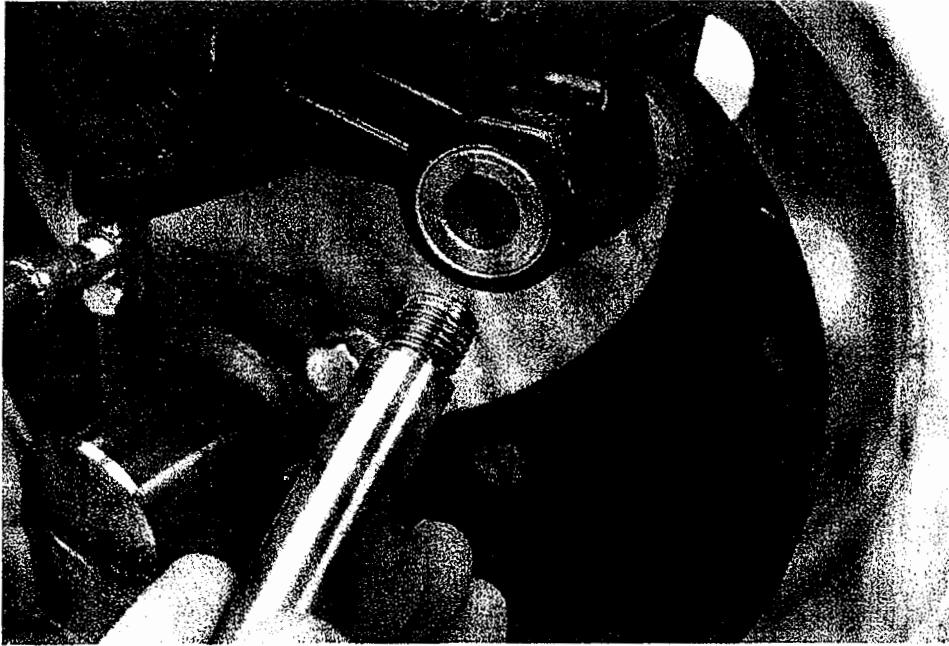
To Align the Caliper Correctly with the Threaded Hole In the Mounting Bracket Lift the Caliper Slightly. You Will Feel The End of the Pin Align With That Threaded Hole.
